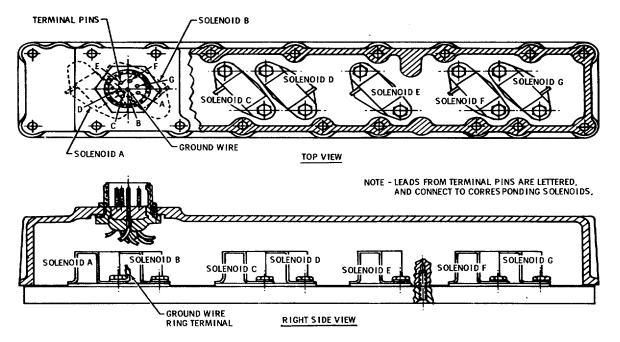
Main Valve body Solenoid electrical Connections-Cutaway View
